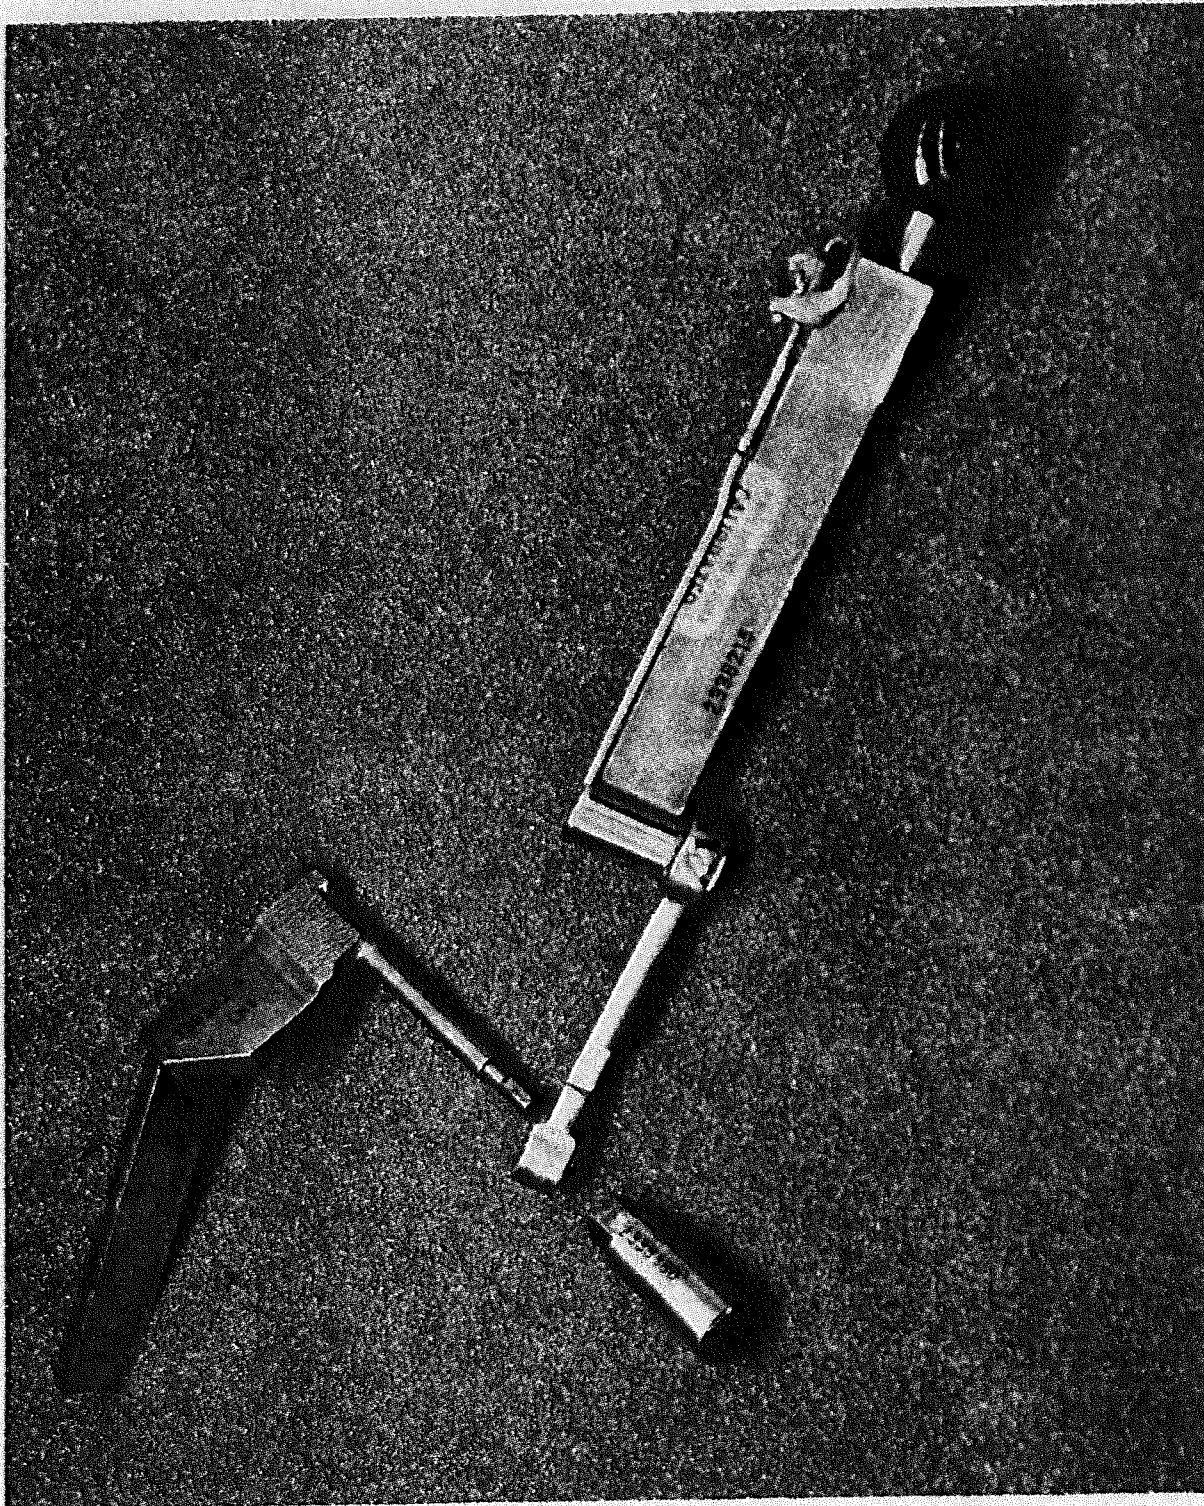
Boydolt Torque Tool Assembly, Short.
